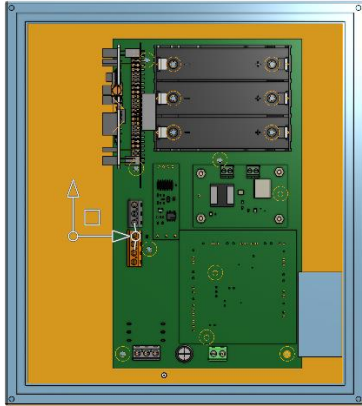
3D model of PCB fitting to scale inside box enclosure.
